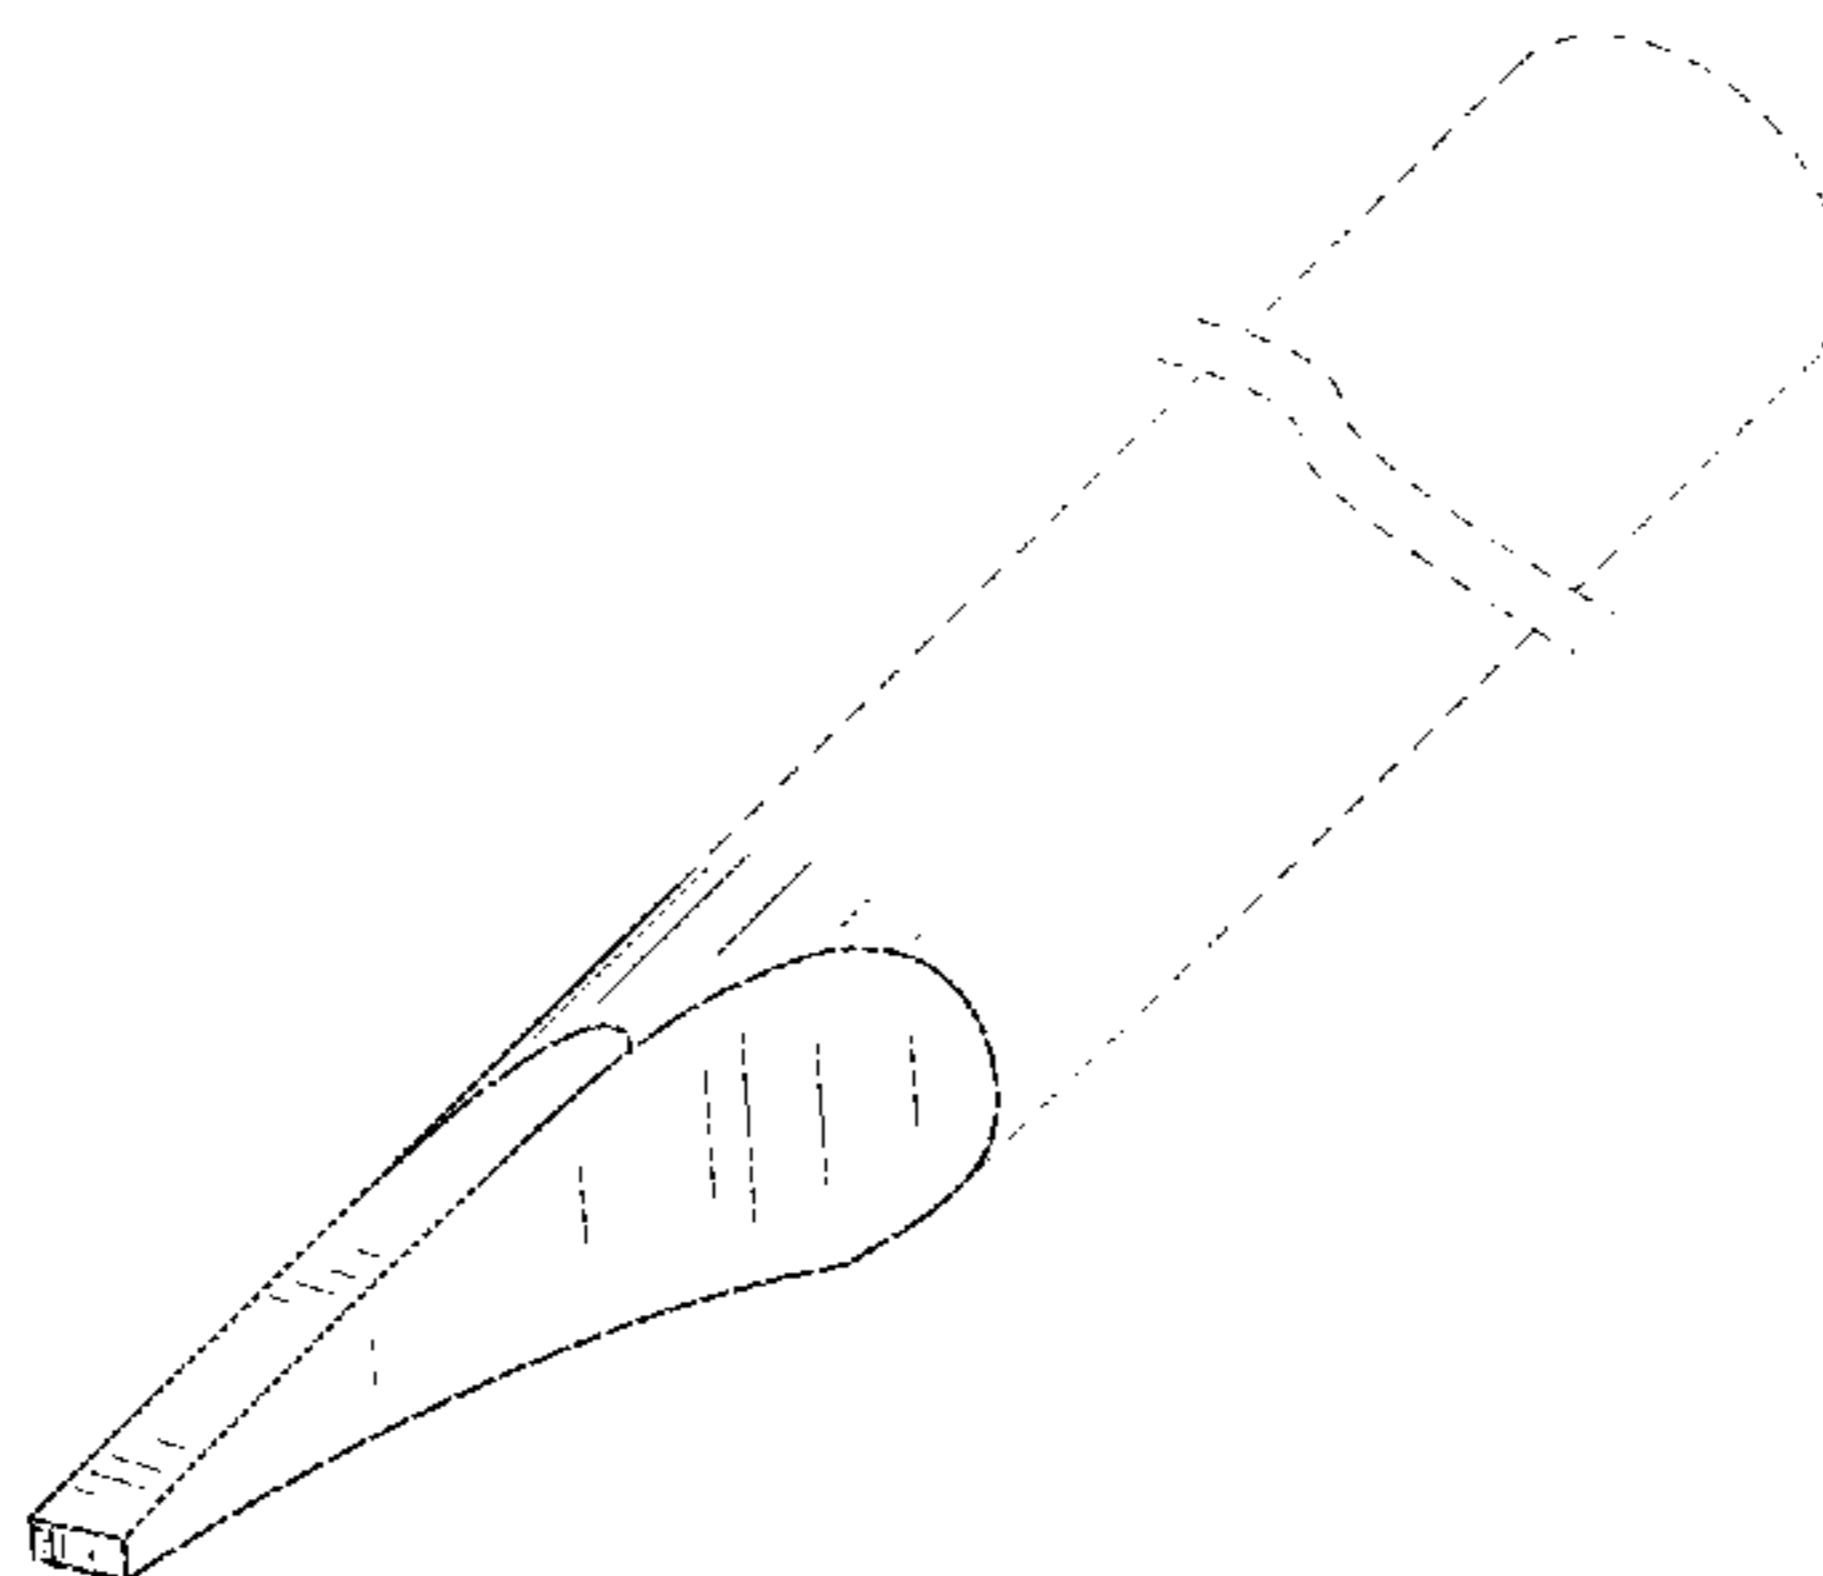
depicts a rear side elevation view of the wire bonding wedge tool of FIG. 1.
